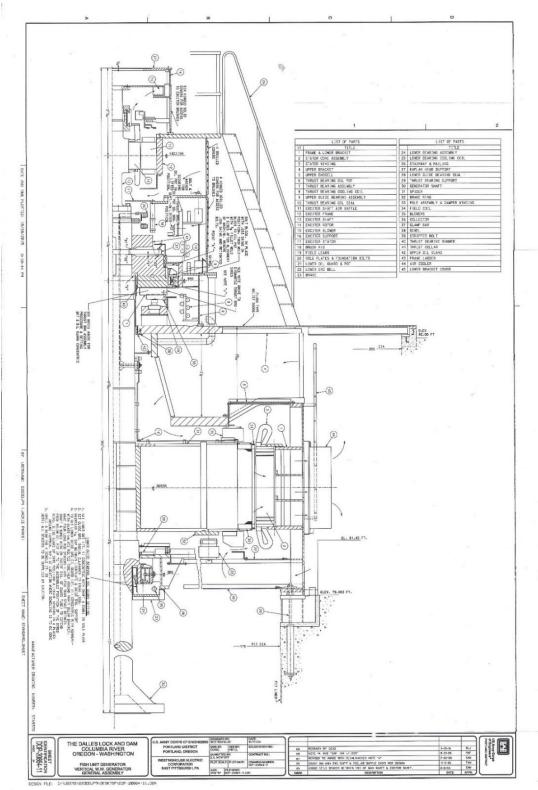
Cross Section of The Dalles Fish Unit Generator
